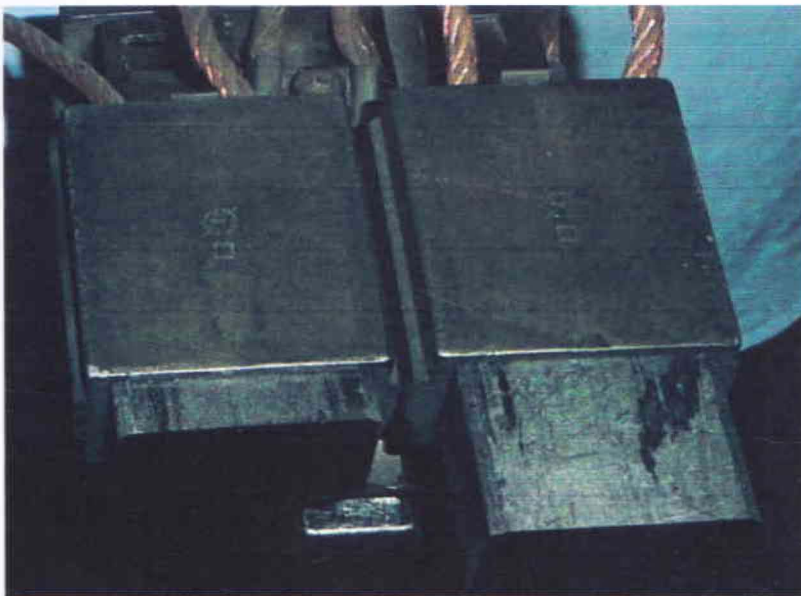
Carbon Brush gear and decayed carbon due to friction
